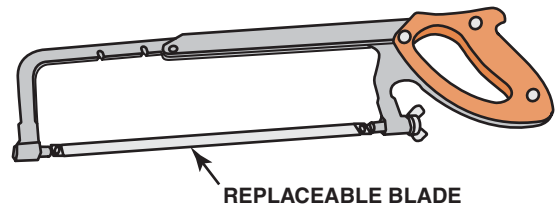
A typical hacksaw that is used to cut metal. If cutting sheet metal or thin objects, then use a blade with more teeth.
